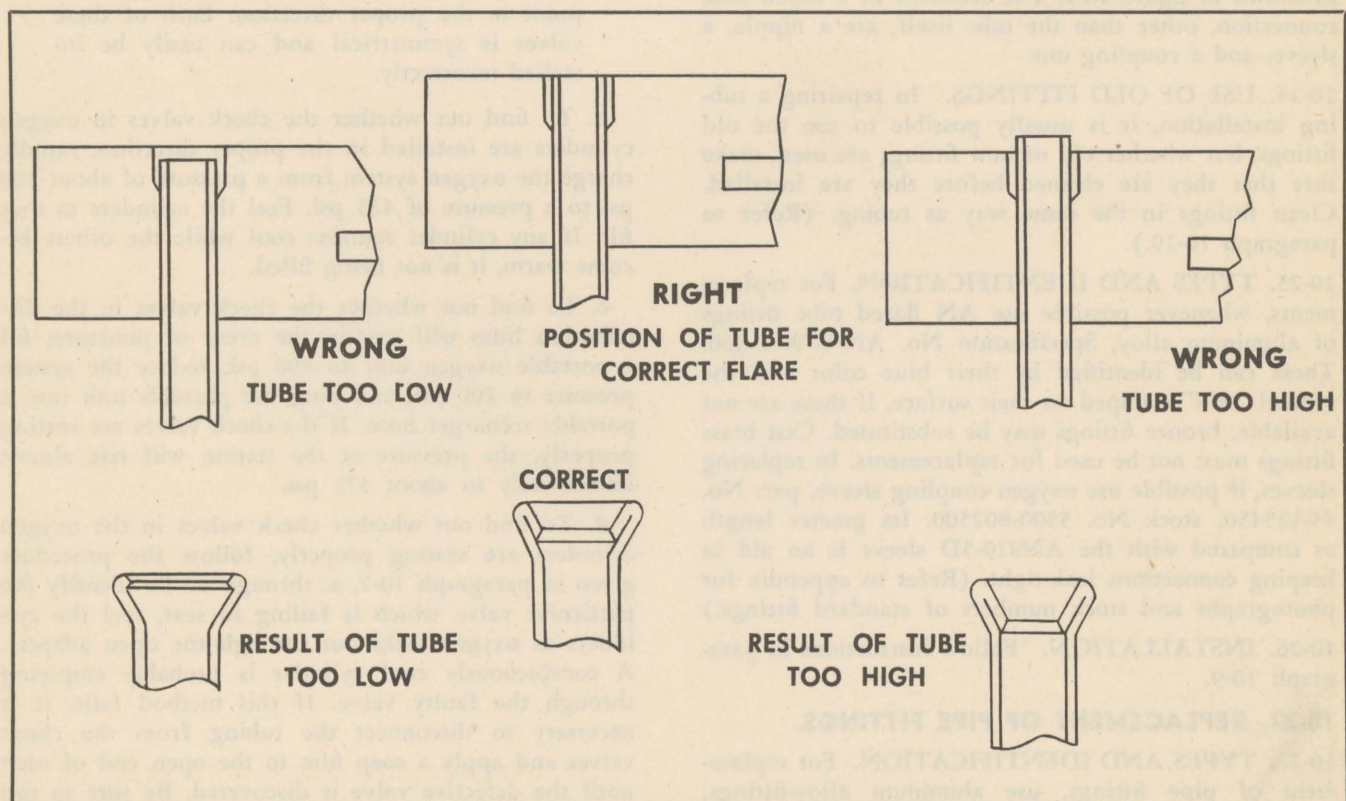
Tube Positions and Resulting Flares: a. Good Flare, b. Short Flare, c. Long Flare
